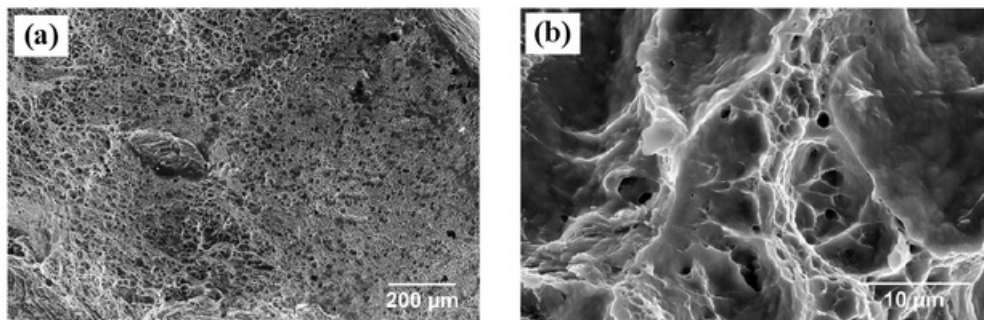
FESEM fractographs of tensile specimen of cast CA6NM steel (a) lower magnification, (b) higher magnification.
